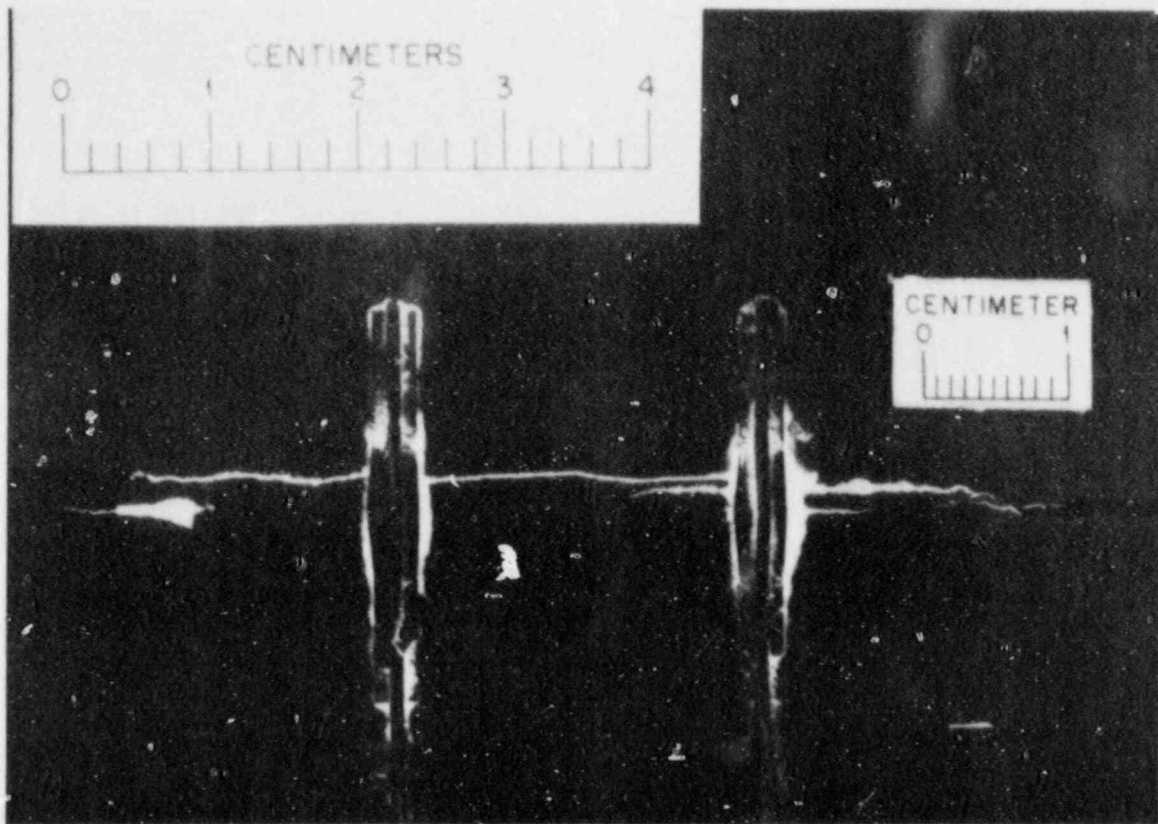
Dye penetrant (examination of plate CP-15 after second pop-in) failed to reveal any extensions of flaw on surface beyond those observed visually.
